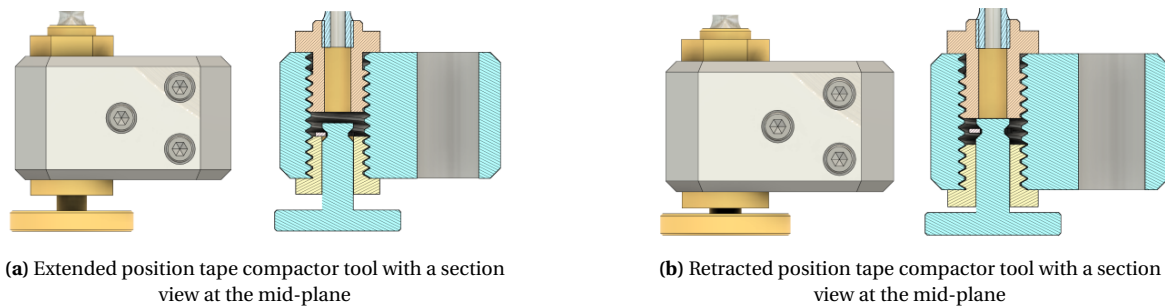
In-house tape compactor tool showing extended and retracted position inside the Prusa XL heatblock. Showing the ability to retract to compensate for surface irregularities.
